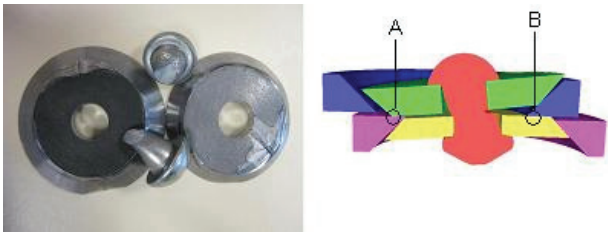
Problems in pure shearing of riveted joints using Arcan test procedure.
